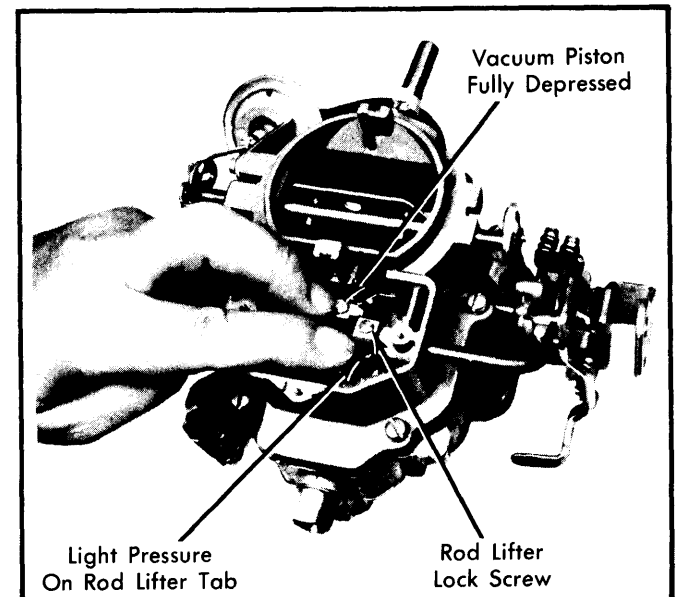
Vacuum Step-Up Piston Gap Qualification
